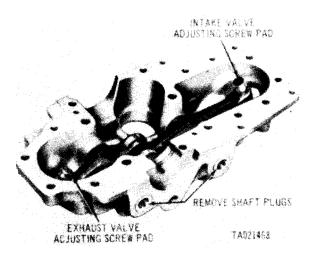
Removing or installing valve rocker arm shaft plugs.
